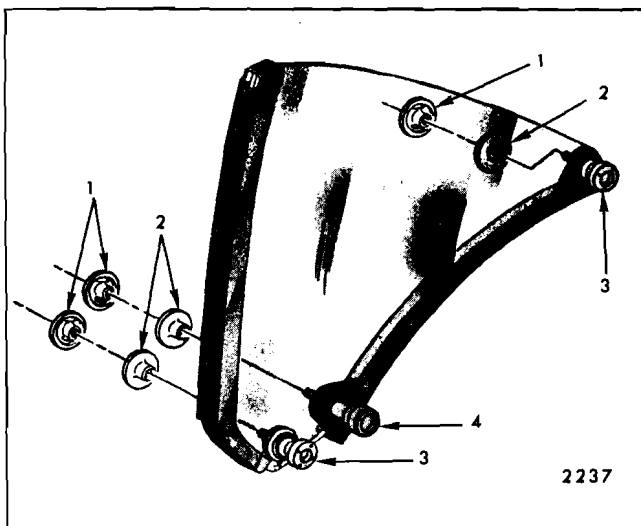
Rear Quarter Window Assembly - "E-87" Style
